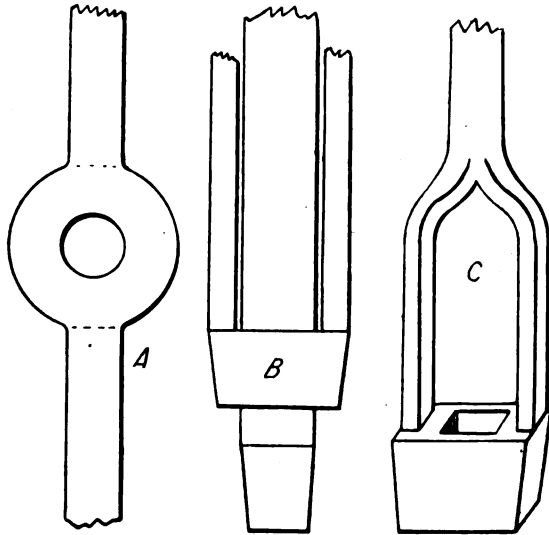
FORGING A HANDY SOCKET WRENCH.
